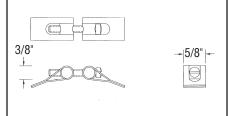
Low Profile – Barrel Nut Assembly Welded to Sheath with 6-32 Screw.
